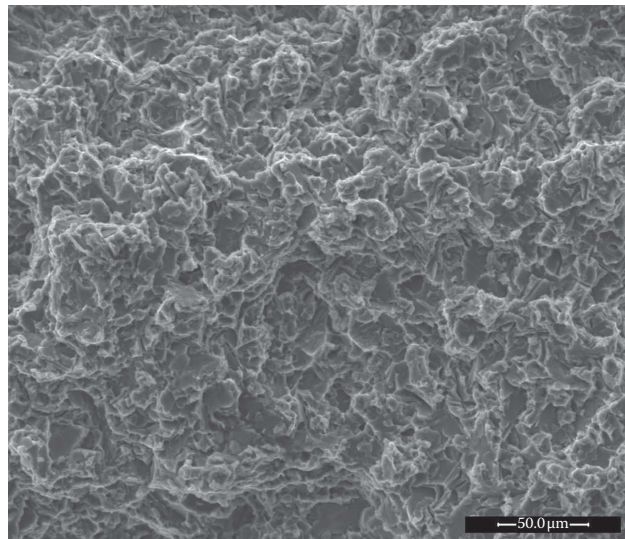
Typical FEG-SEM view of the fracture surface of sound specimens
